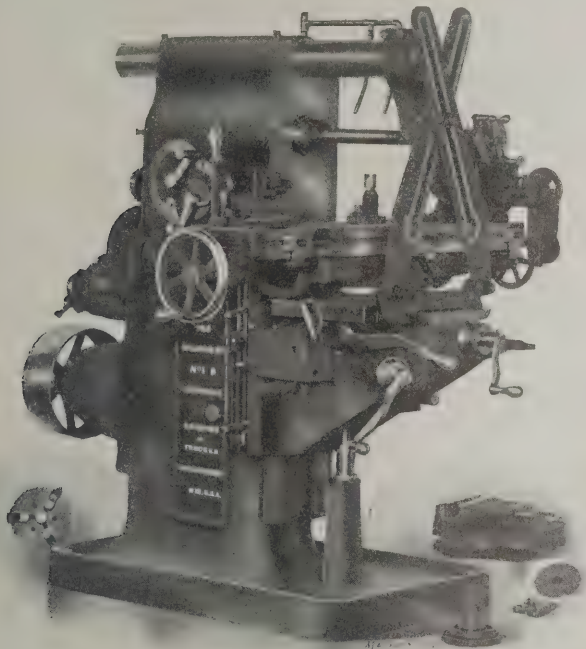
Milwaukee Gear-driven Universal Milling Machine.
